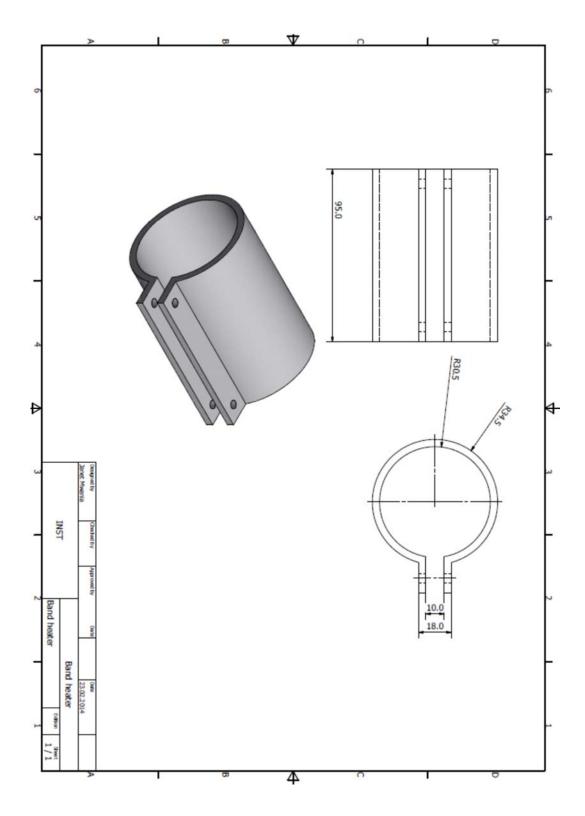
3D image of the 500W band heater with End and Front elevations and dimensions(mm)
